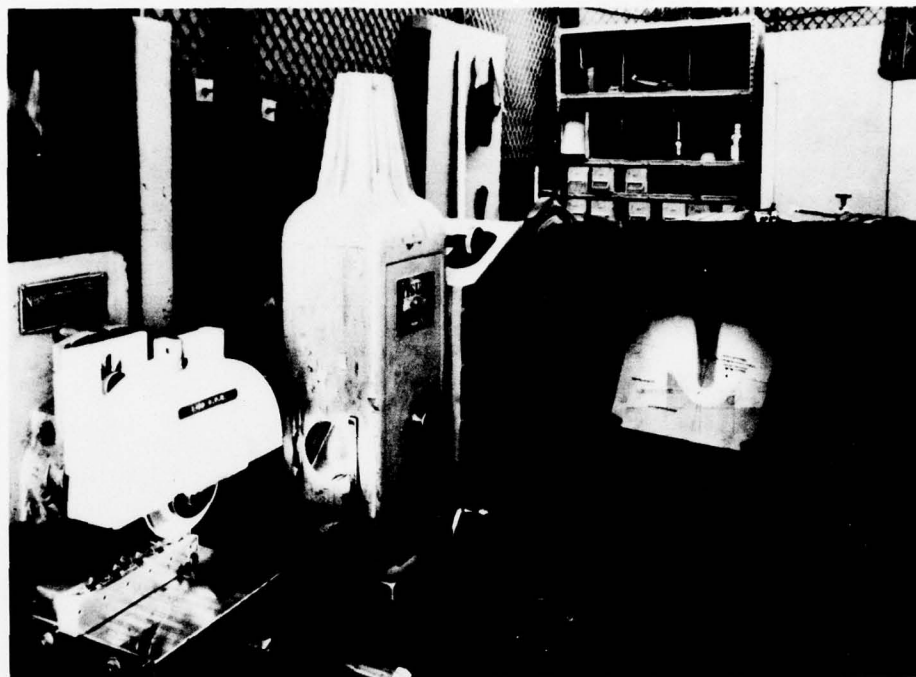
Set-Up for Gang Grinding Airfoil Concave Surfaces
